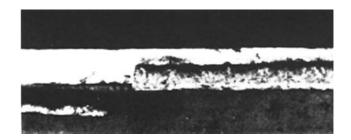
Convenient self-peeling slag removal and glossy bead appearance with DW-100 in horizontal fillet welding.
